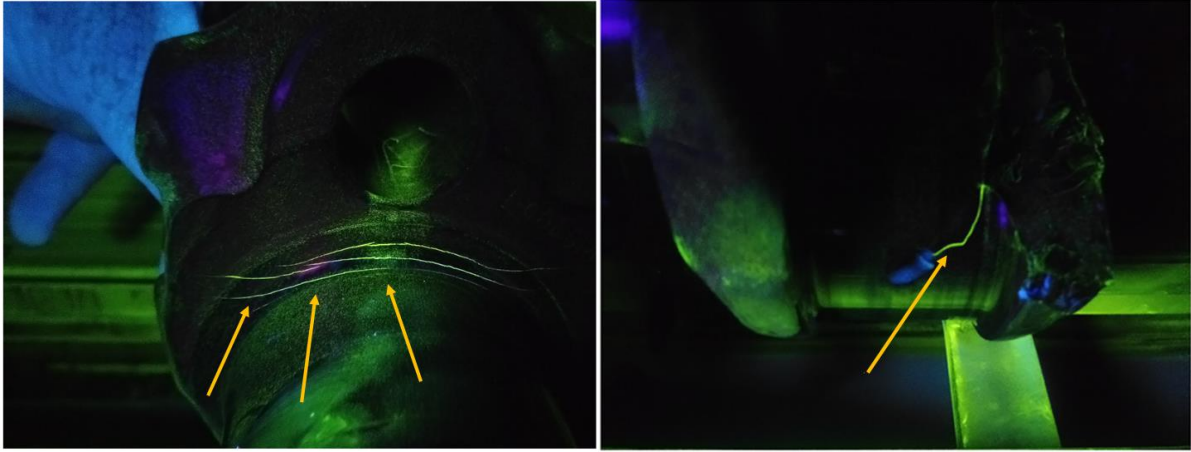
Front view of the crankshaft's fatigue crack initiation and progression.
